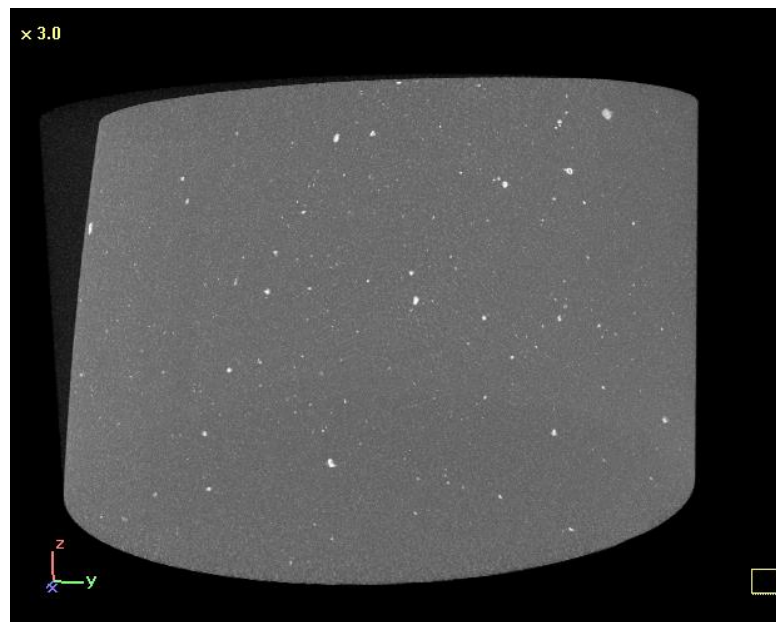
A 3D x-ray display of an O-ring section from a conventionally manufactured 6.99 mm O-ring. The section contains less white specs compared to the previous section from a conventionally manufactured O-ring.
